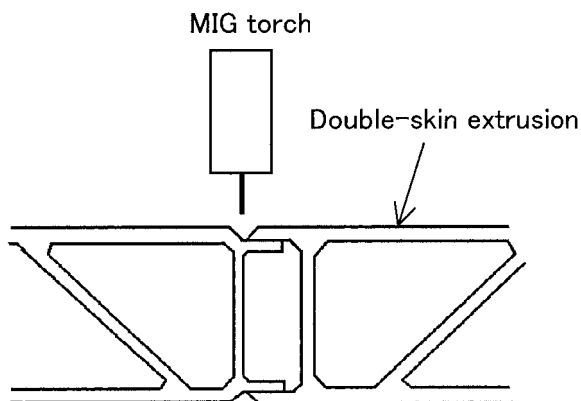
Welding procedure of double-skin extrusion by MIG.
